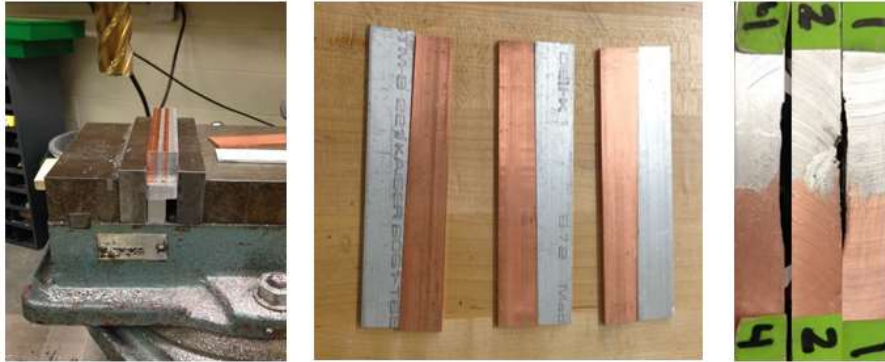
Procedure Steps for Al-Cu FS Welding
